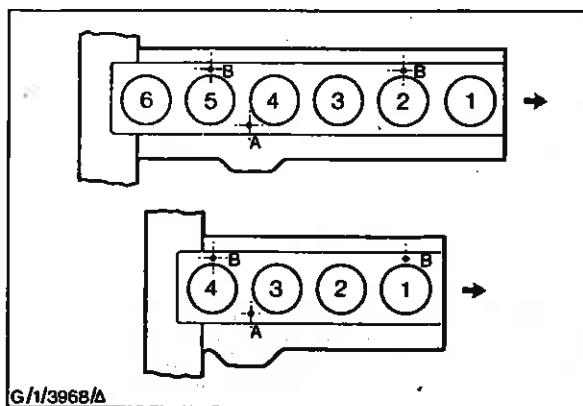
Cylinder Head/Gasket Locating Dowels
